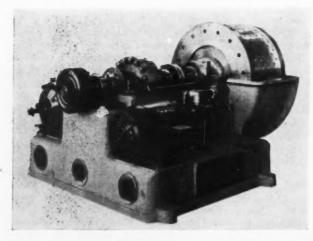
DRY HOUSING, UPPER HALF OF LIQUID HOUSING, AND UPPER HALF OF SERVOMOTOR HOUSING
